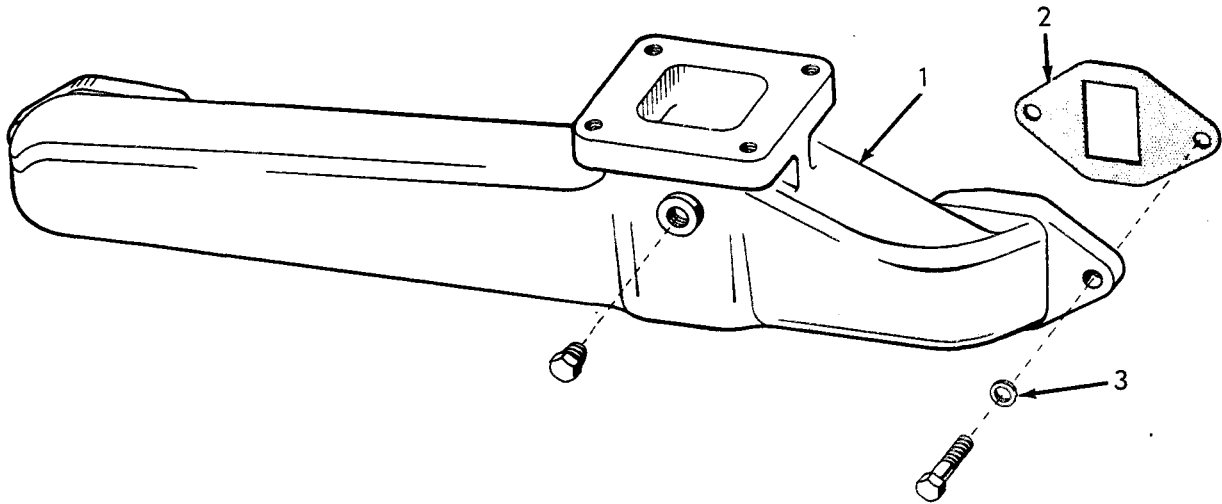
EXHAUST MANIFOLD - MODEL 2900 SHOWN
